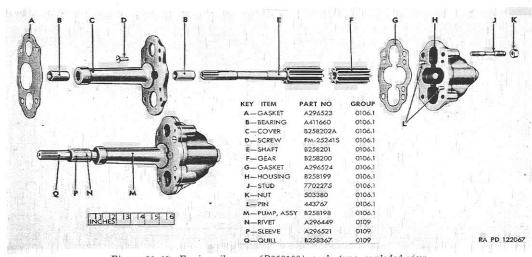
Engine oil pump (B258198), early type, exploded view.
